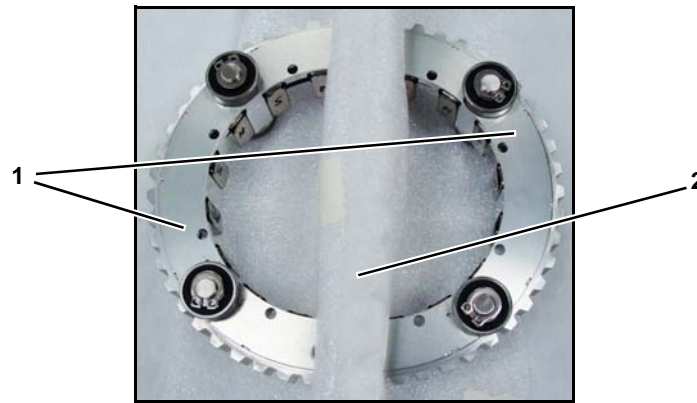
Loosening the Two Coupling Screws on the Center Gear
